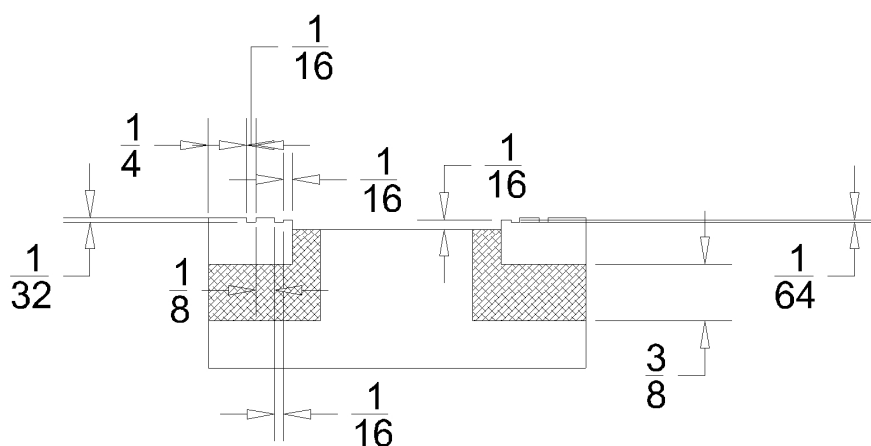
Side view schematic of the flat membrane cell with dimensions in inches.
